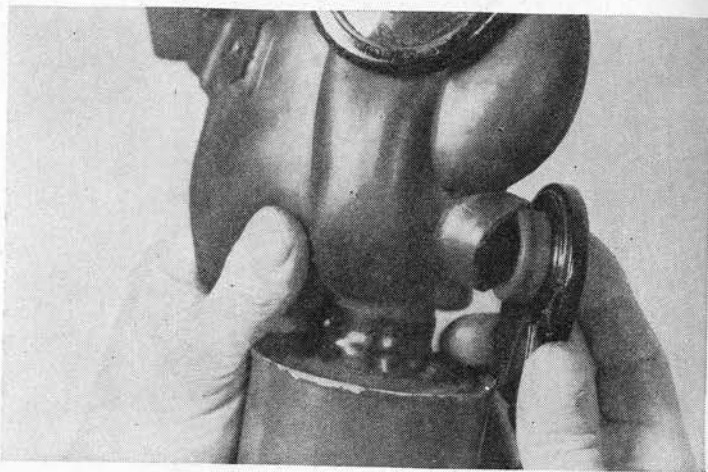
Inserting assembled MV valve into facepiece outlet valve nozzle.
